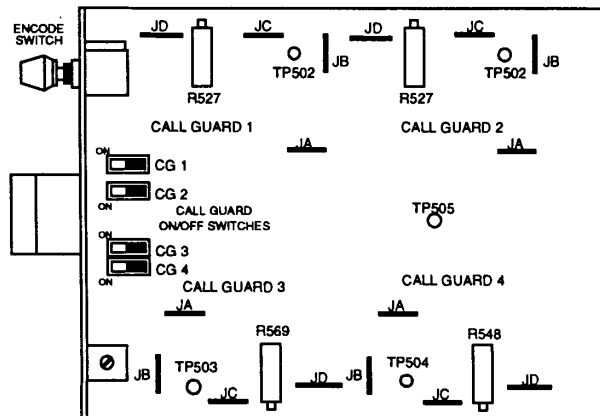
CALL GUARD CARD ALIGNMENT POINTS
